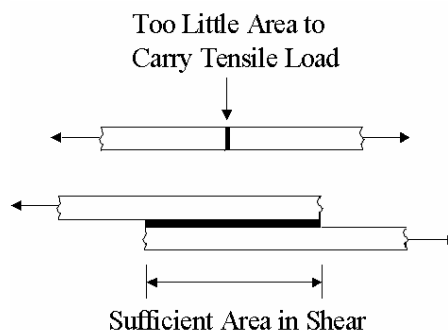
Good and Bad Load Transfer in Bonded Joints³
